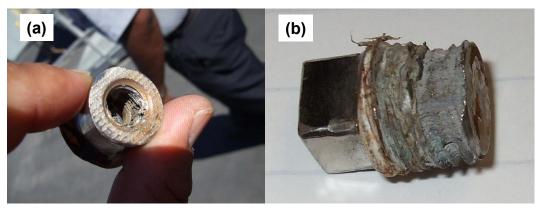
(a) 316 stainless steel threadolet where the threads have corroded. (b) Corroded 316 stainless steel plug.
